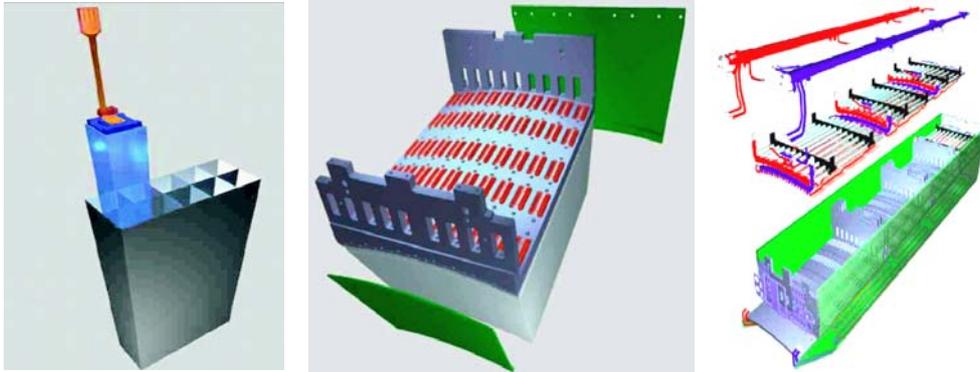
Stages of an ECAL supermodule assembly. Left: Alveolar submodule during insertion of the first crystal; Centre: Complete module; Right: Expanded view of a supermodule with cooling circuits
